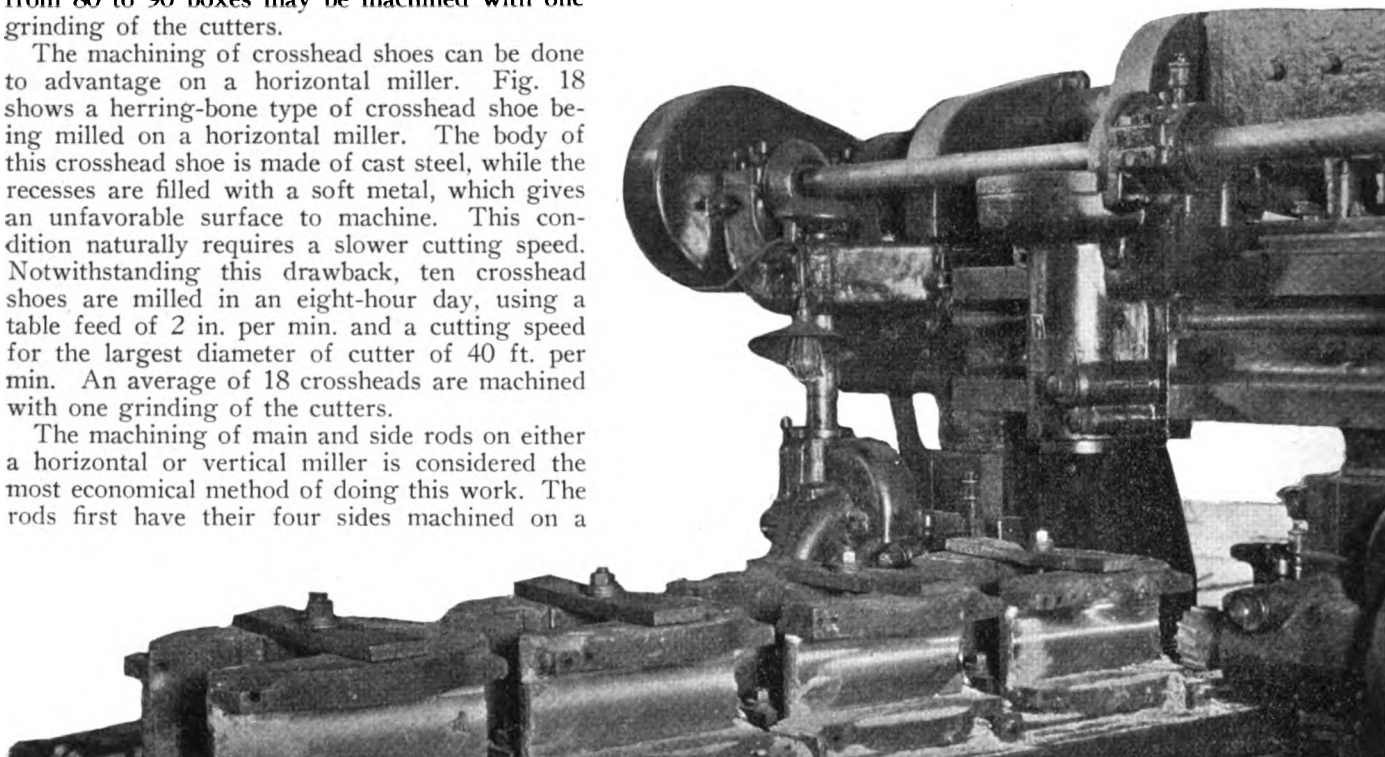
Milling the shoe and wedge fits of driving boxes using two inserted tooth facing cutters
